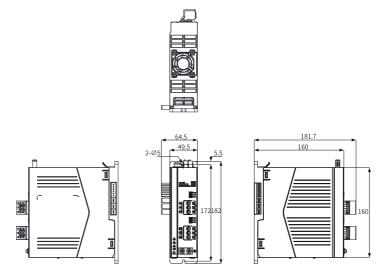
Overall and mounting dimensions of the dual-axis drive unit (unit: mm)
